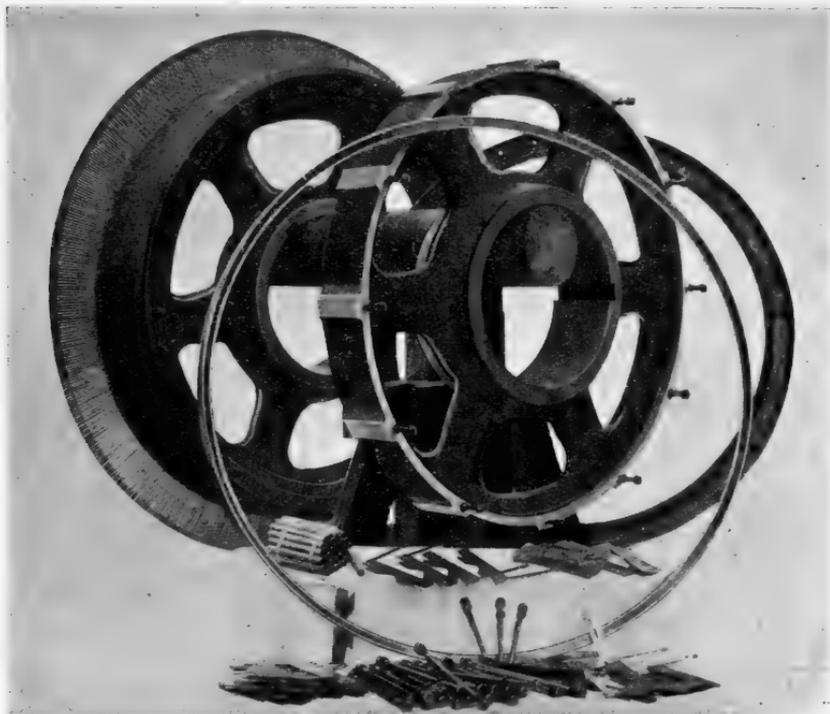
Component parts of large Commutator. Dick, Kerr & Co.
